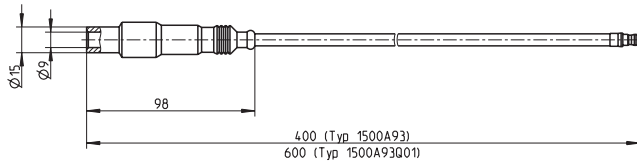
Spark plug extension cable Types 1500A93 (L = 400 mm) and 1500A93Q01 (L = 600 mm)
